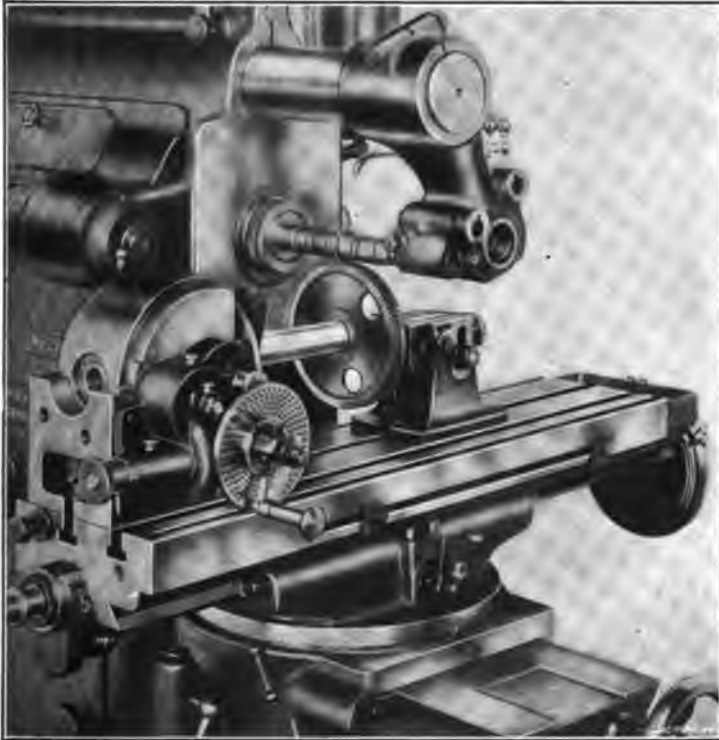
Gashing a Worm-wheel in a Universal Milling Machine
